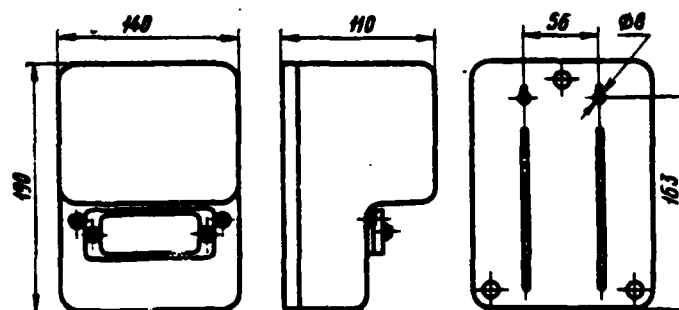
Input board type ShchV-66 and input-insulating board type ShchVI-66E.
